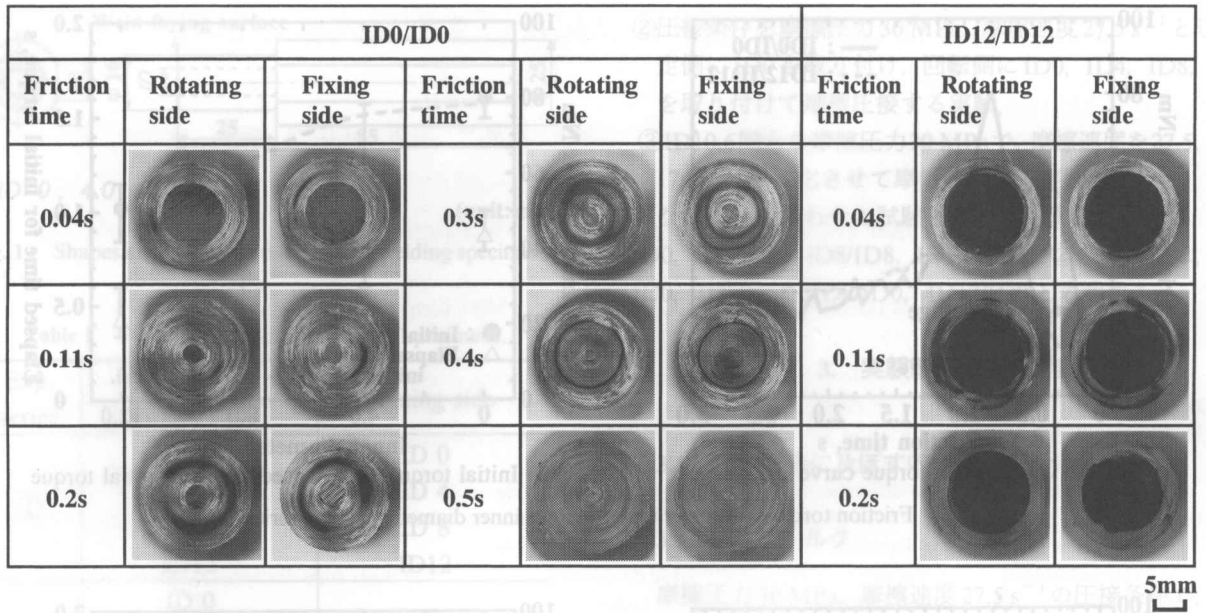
Appearances of welded interfaces after welding under various inner diameters of pipes (Exp. series ①).
